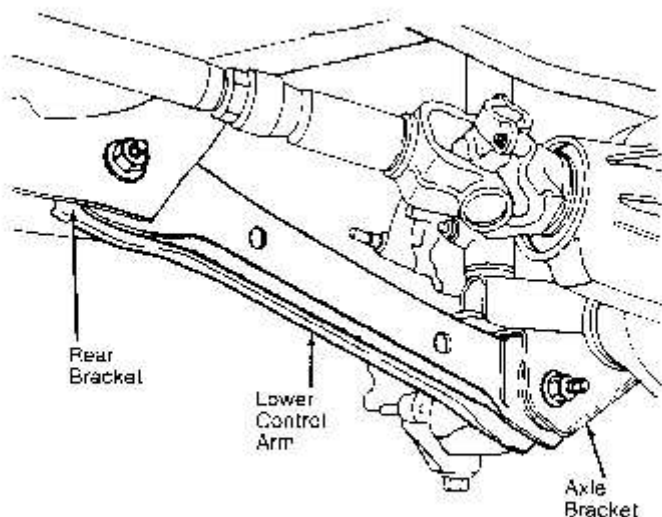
Identifying Lower Control Arm (Except Wrangler)
